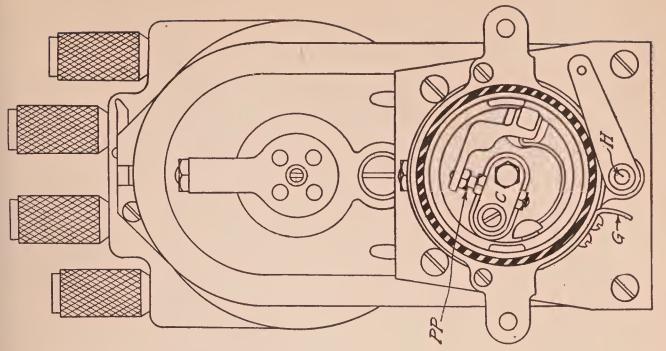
Contact Breaker of High-Tension Magneto (Bosch)
